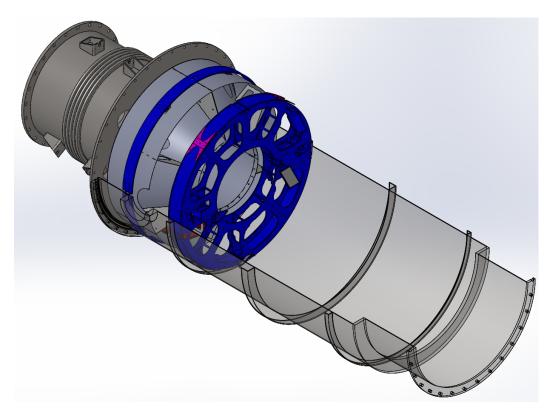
PCal Periscope Assembly and Cryopump/Manifold Baffle Assembly located in the A-7 Adapter
